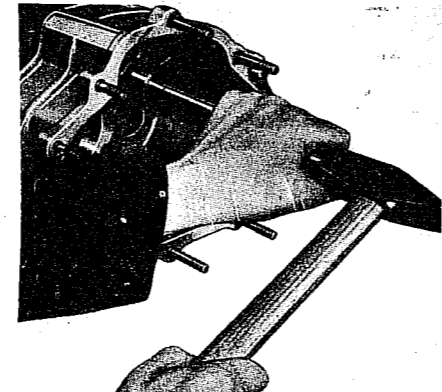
Driving out the reverse idler shaft-needle bearing.
